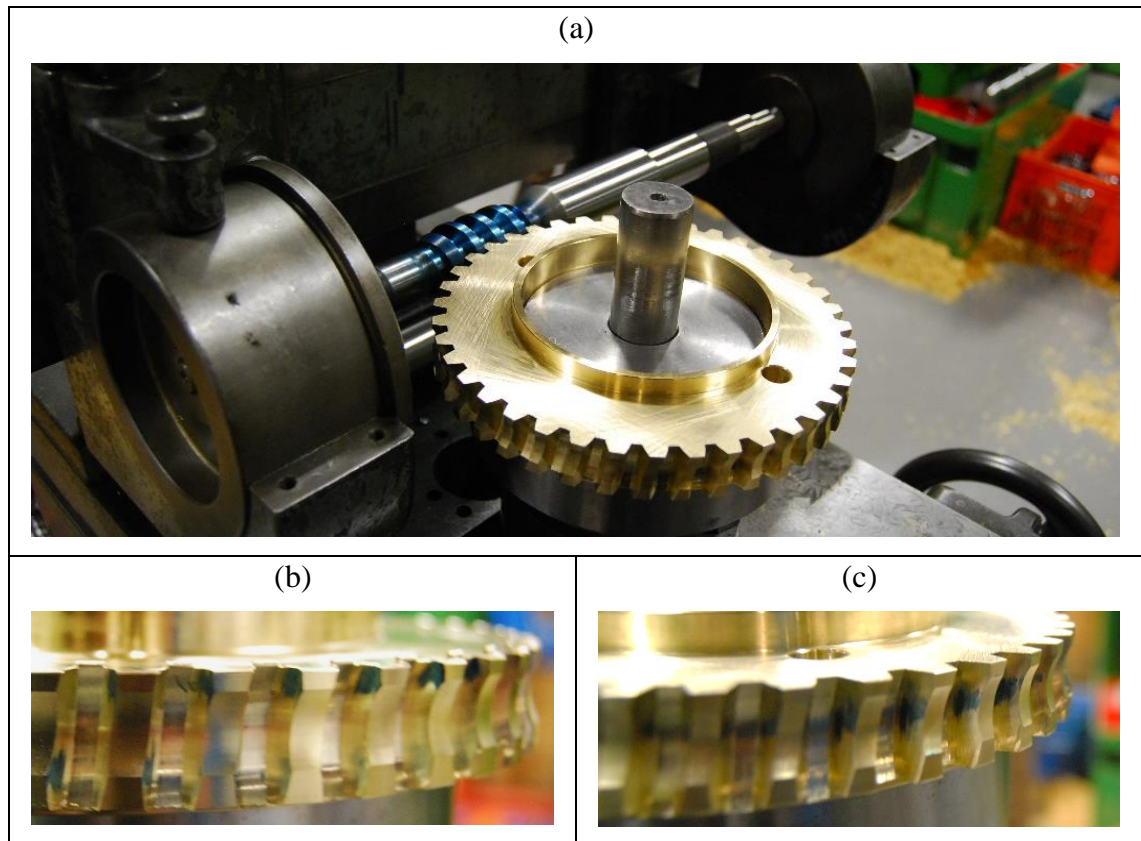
Mesh checking of a worm gearset manufactured to BS 721 (British Standards Institution, 1983). (a) worm with blue dye driven against wheel, (b) blue dye transfer from worm to wheel demonstrates edge contact, (c) centre contact achieved by modified hobbing method of applying 2° tilt angle to cutting hob.
